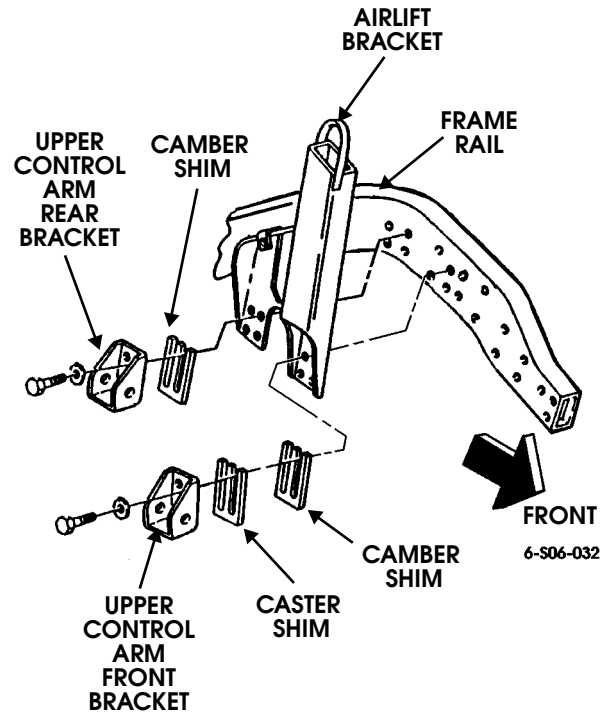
Caster Shim Location (Passenger Side Front Shown)
